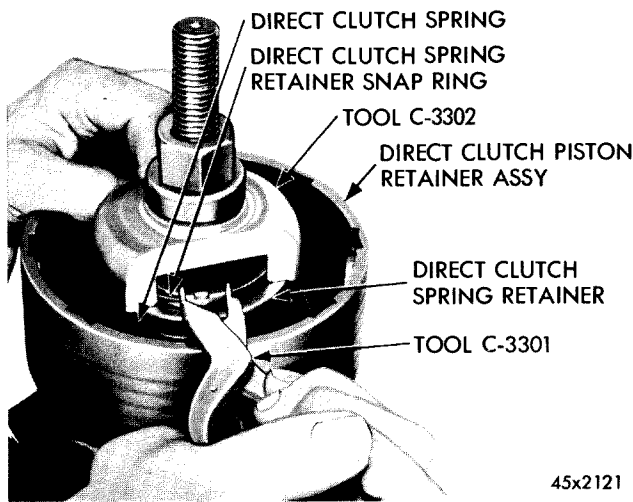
Removal or Installation of Spring Retainer Snap Ring
